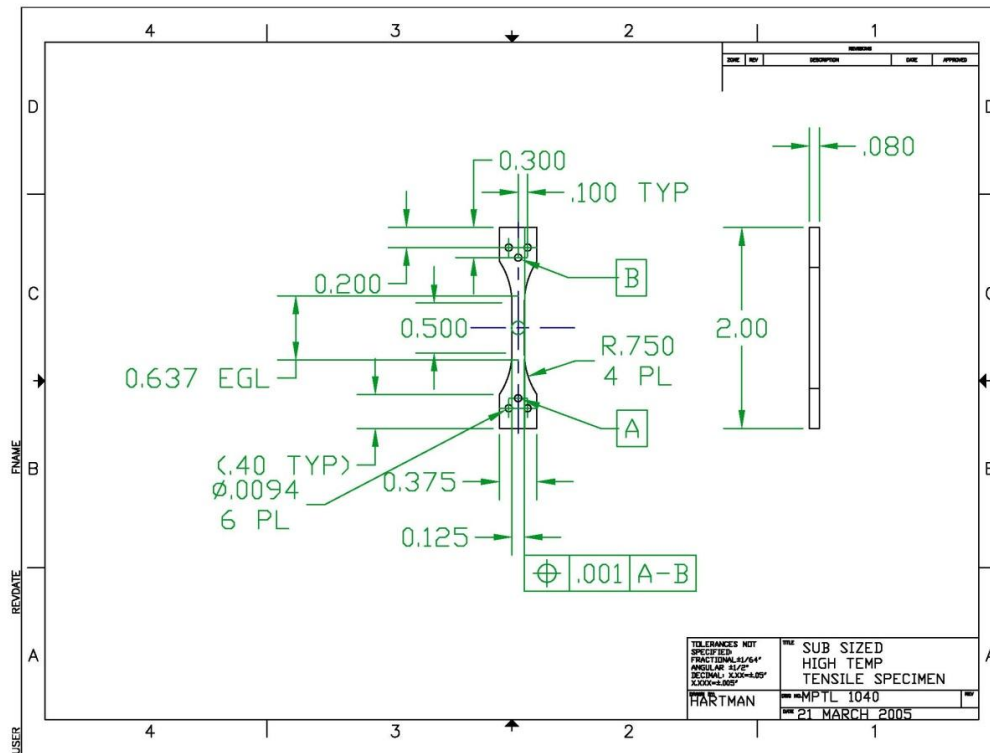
Honeywell tensile specimen drawing used for ultra-high temperature testing.
